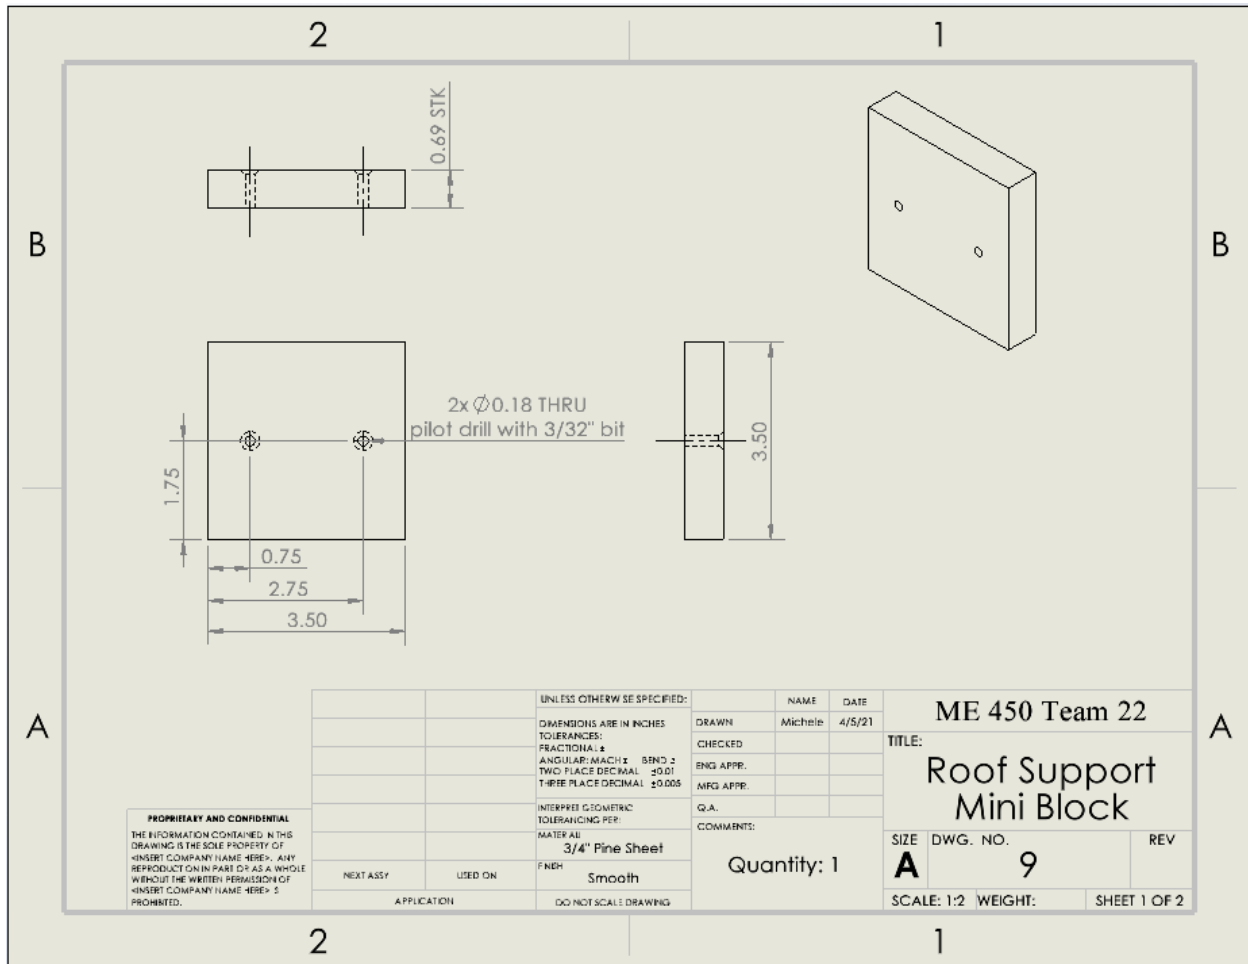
Engineering Drawing of the Roof Support Mini Block.
